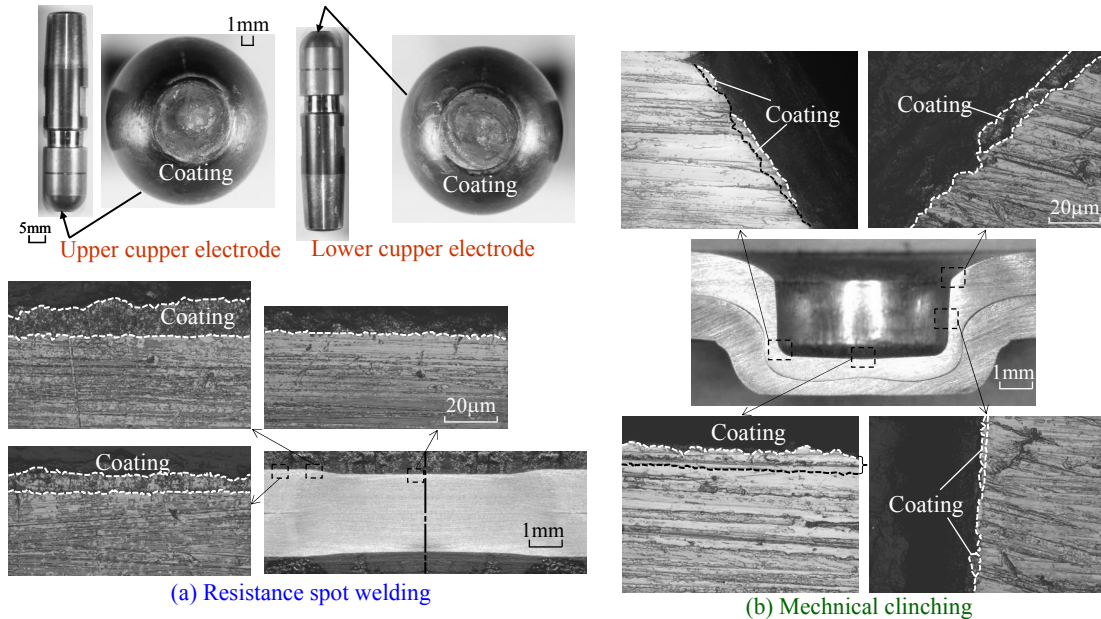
Coating layers on surface of sheets after resistance spot welding and mechanical clinching.
